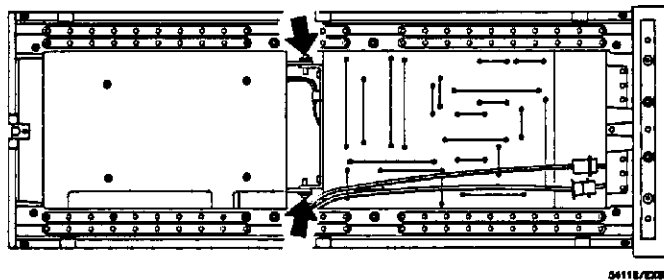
A-4. Color CRT Module, Rear Mounting Screws
